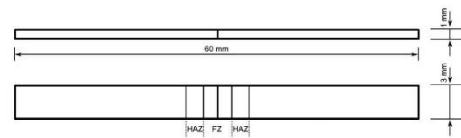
Dimensions of the tensile specimens. The heat affected (HAZ) and fusion zones (FZ) are not to scale as they depend on the laser welding parameters.
